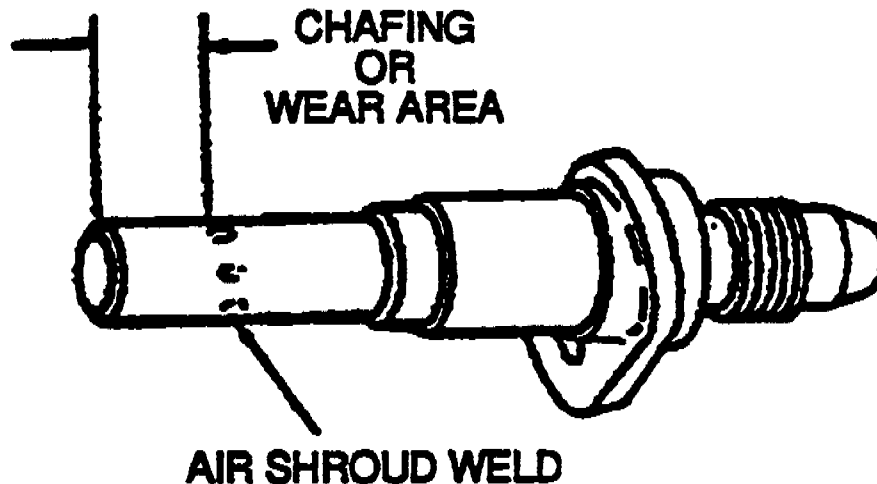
Starting Fuel Nozzle Inspection Area.
